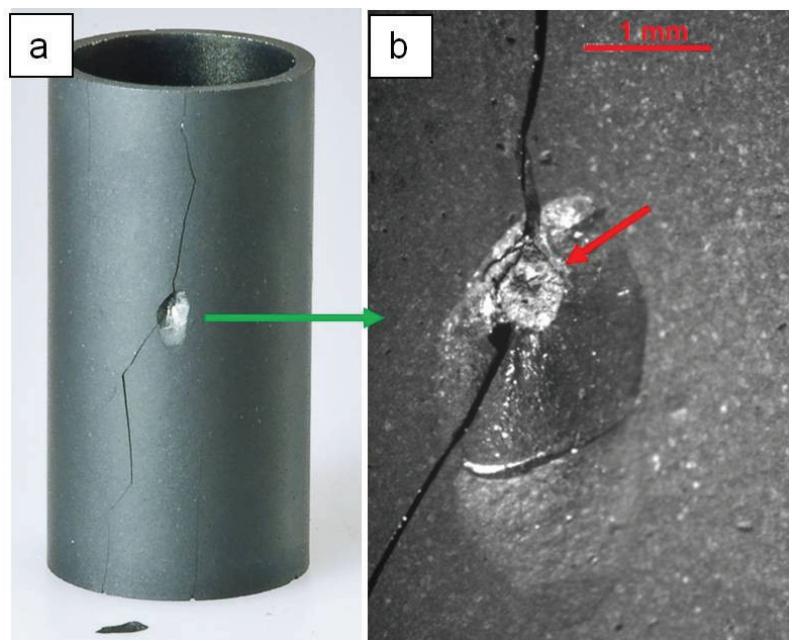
Tubular specimen after compressive creep test. a) overview, b) chip fracture at the outer surface in higher magnification.
